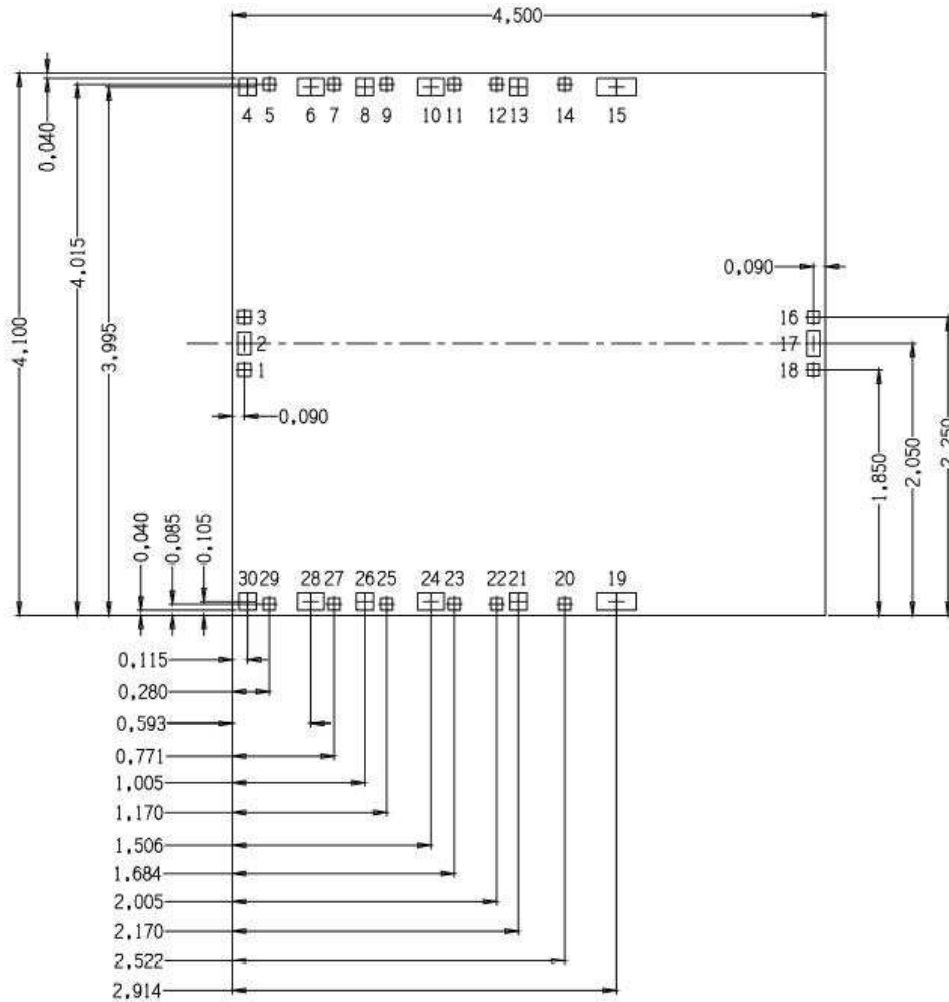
CGY2139AUH/C1 Pad layout drawing
